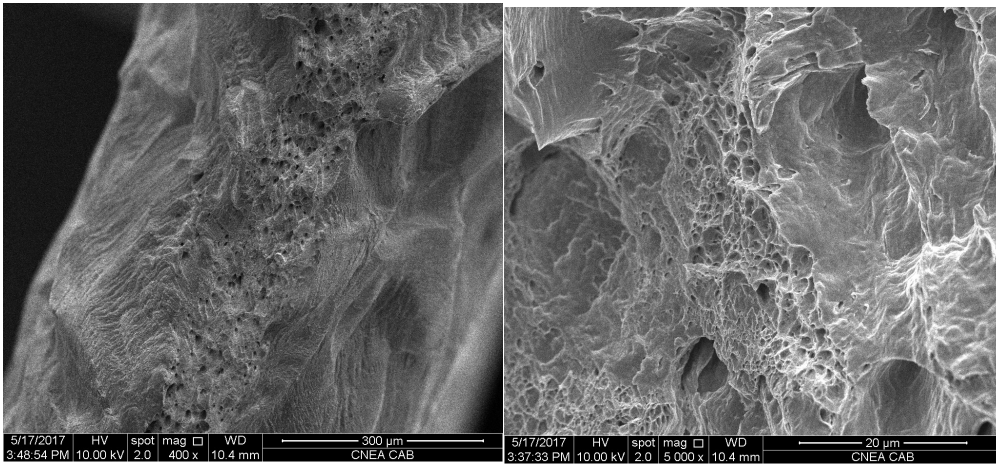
Fracture surface of Specimen #1 with 400 and 5000 zoom.
